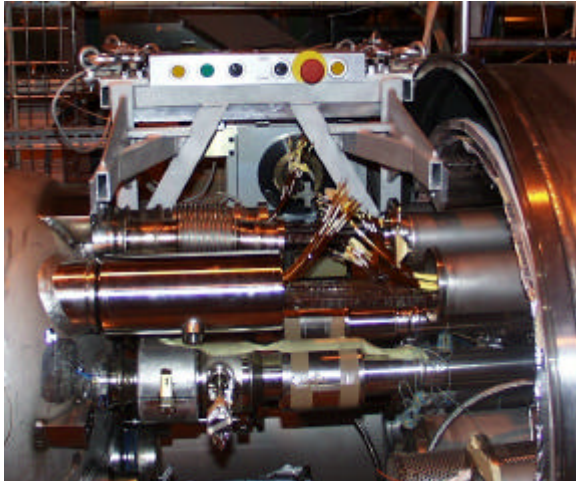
Ultrasonic welding machine on STRING2
